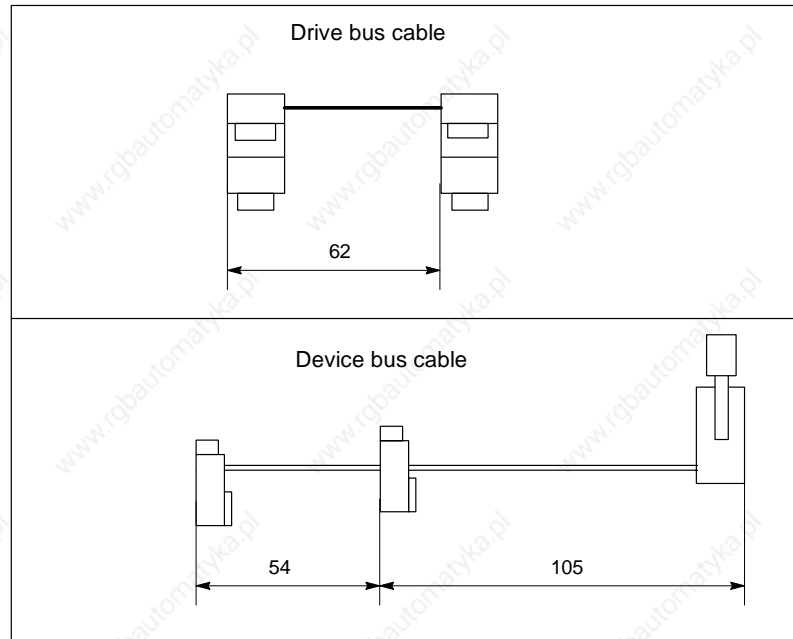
Cable set for axis expansion with the SIMODRIVE 611D module
